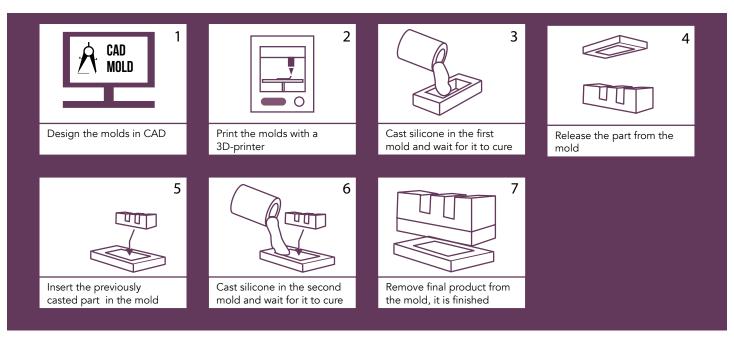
The production process of a pneumatic actuator via silicone hand casting
